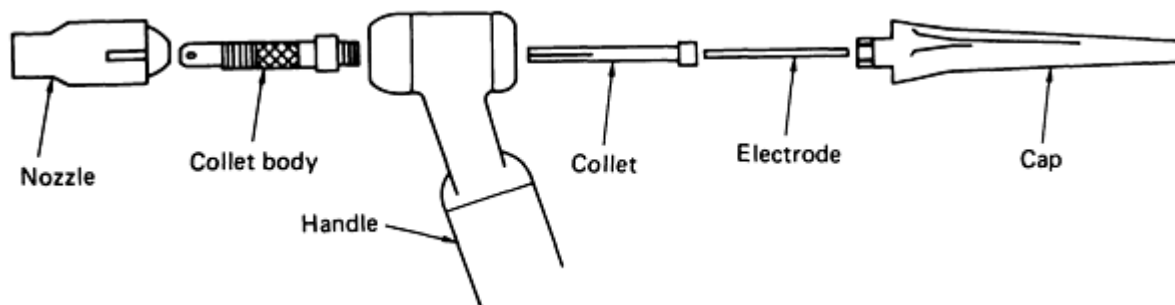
SCHEMATIC SHOWING EXPLODED VIEW OF KEY COMPONENTS COMPRISING A GTAW MANUAL TORCH
